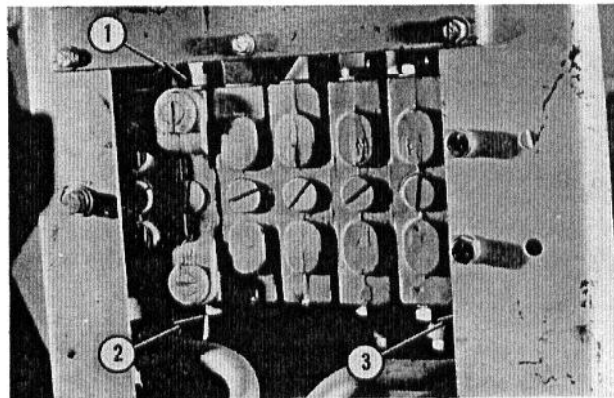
Location of Circuit Reliefs In Boom and Dipperstick Working Sections of Control Valve — Dress Console Removed
